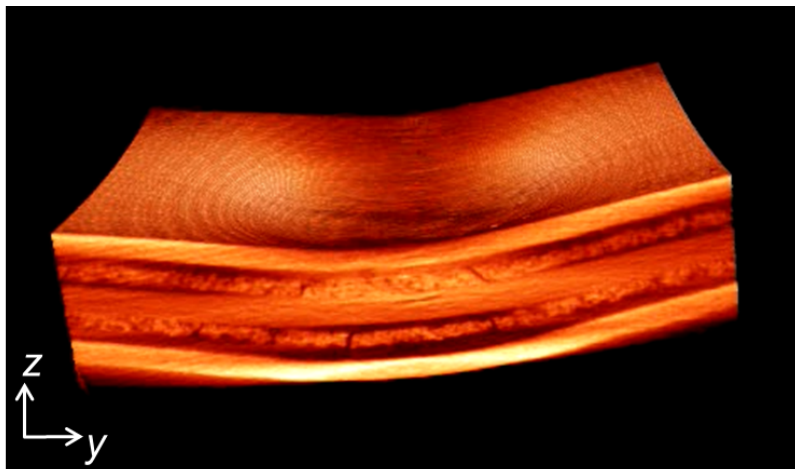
Reconstructed 3D image of Y-Z cross-section of impact damage to FML 1 2/1.
